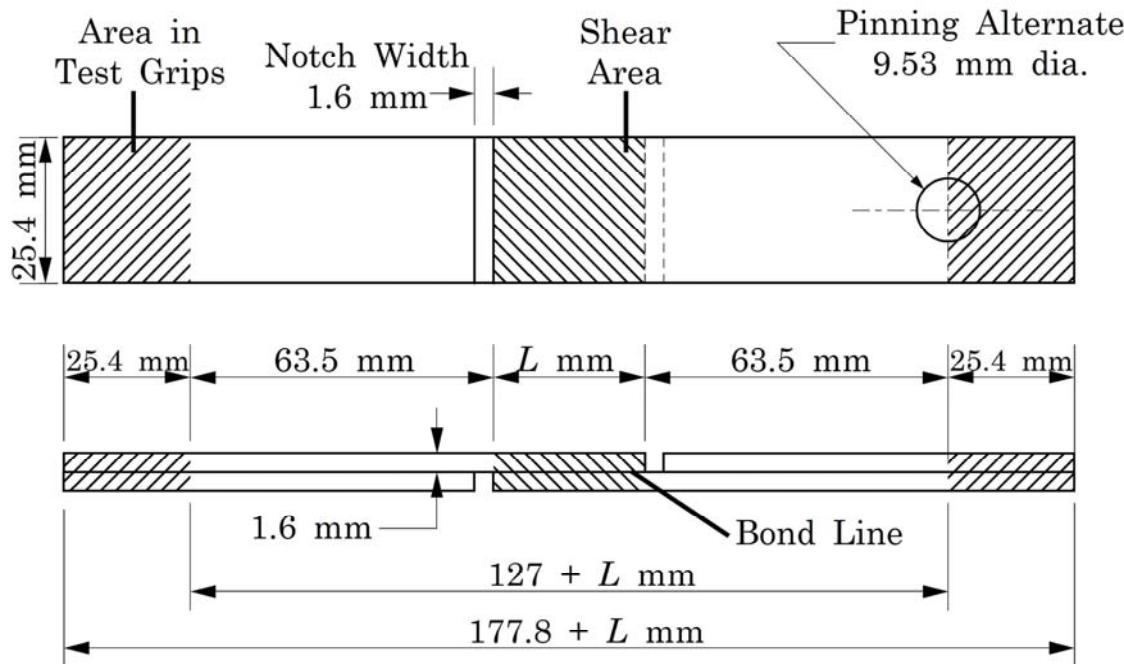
ASTM D-1002: Single lap test specimen
